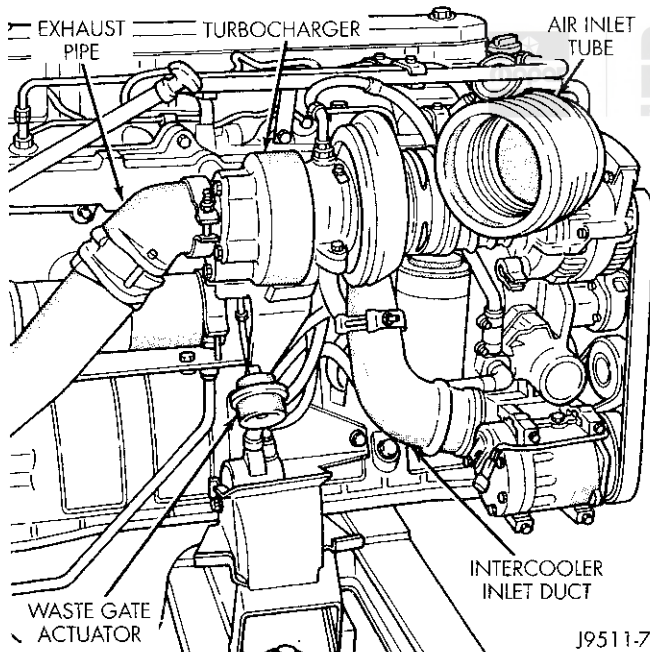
Oil Supply Line and Charge Air Cooler (Intercooler) Inlet Duct
